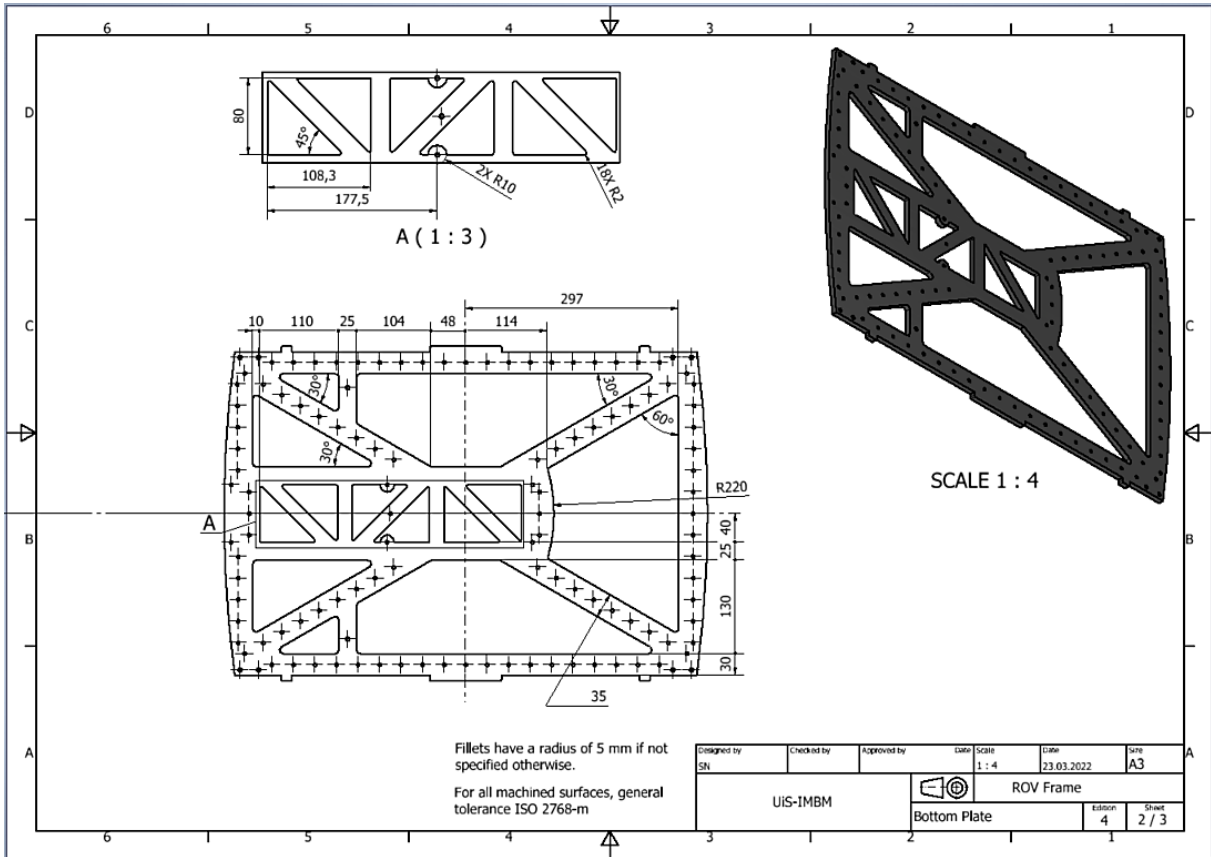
Technical drawing of the bottom plate sheet 1/3
